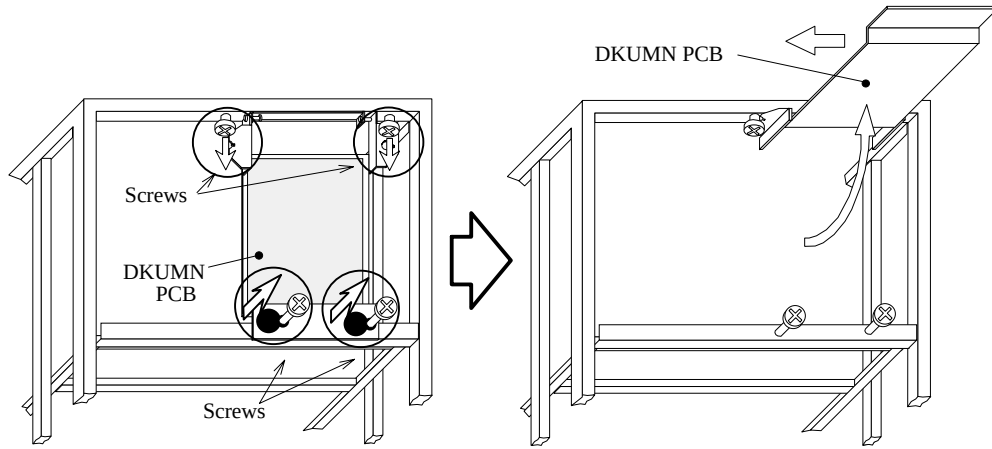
Lift of DKUMN PCB
